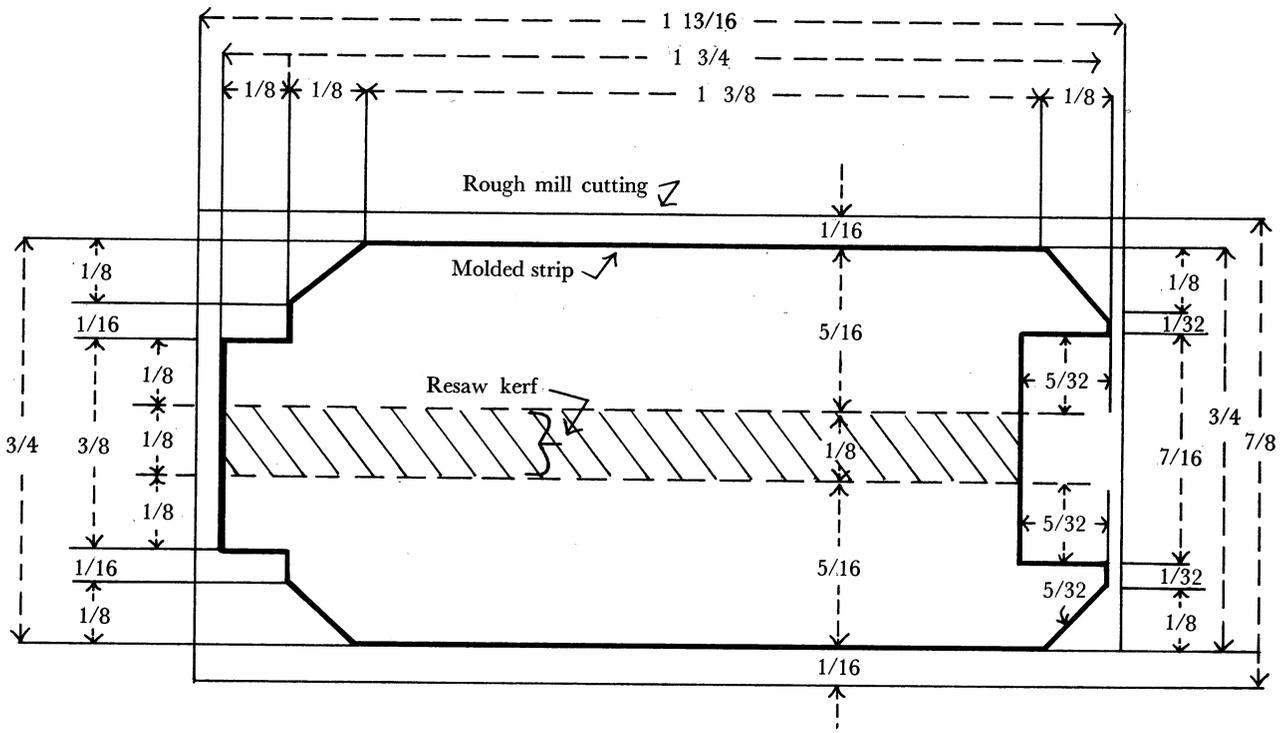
Cross section of machining pattern used to produce a double thickness of overlapping tile, which can be resawed to make two tiles $\frac{5}{16}$ inch thick.
